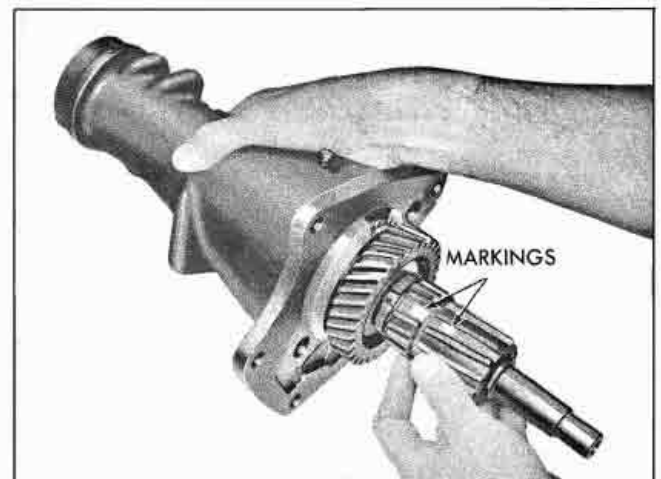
Alignment of Synchronizer Clutch Splines on Mainshaft and Second Speed Gear
